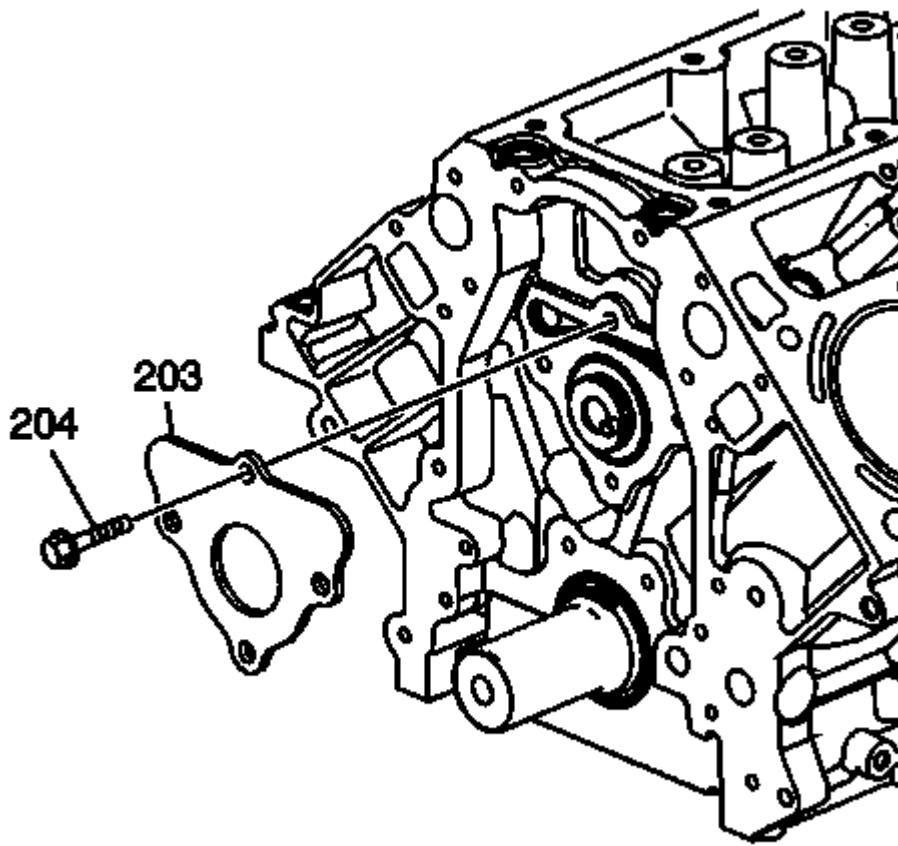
View Of Camshaft Retainer & Retainer Bolt
